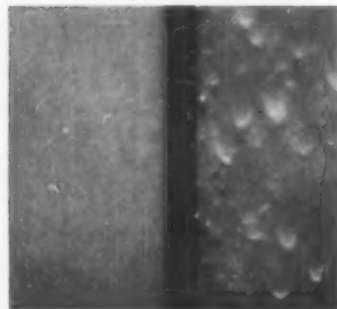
Weatherstrip extruded from dry blend with (left) and without vacuum, showing improvements in surface quality using vacuum.
